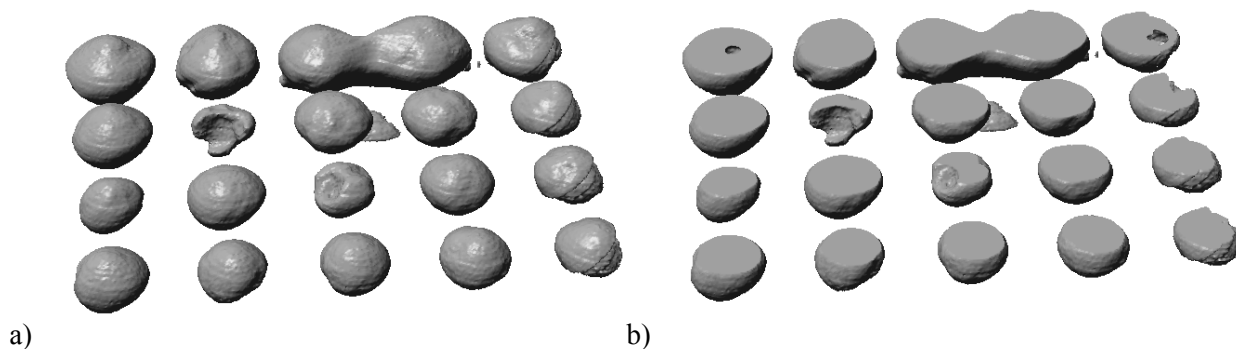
3D reconstruction of BGA- soldering. a) Ball's shapes b) Cavities within the balls
